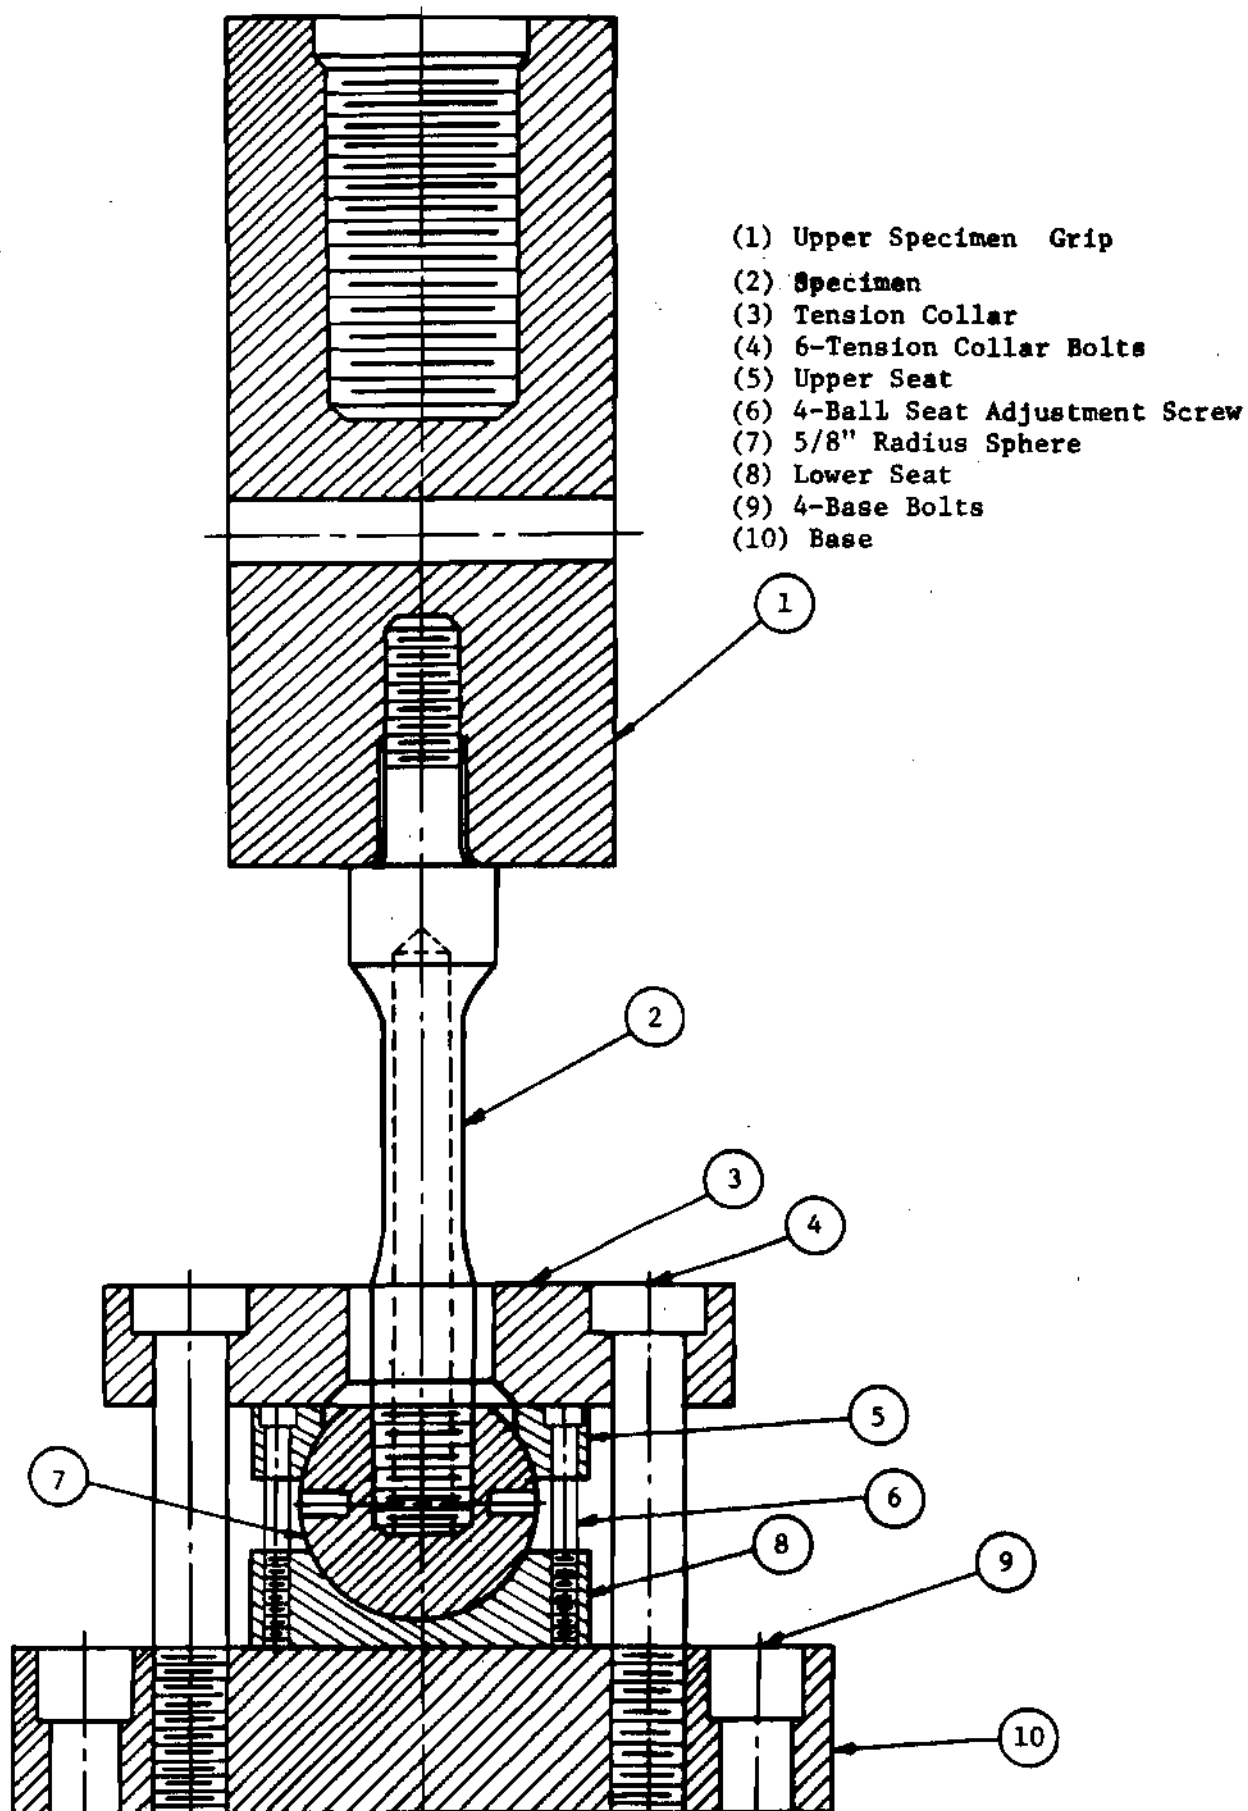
Assembly View of Reversed-Axial-Load Test Equipment (Fixed-Pinned End).
